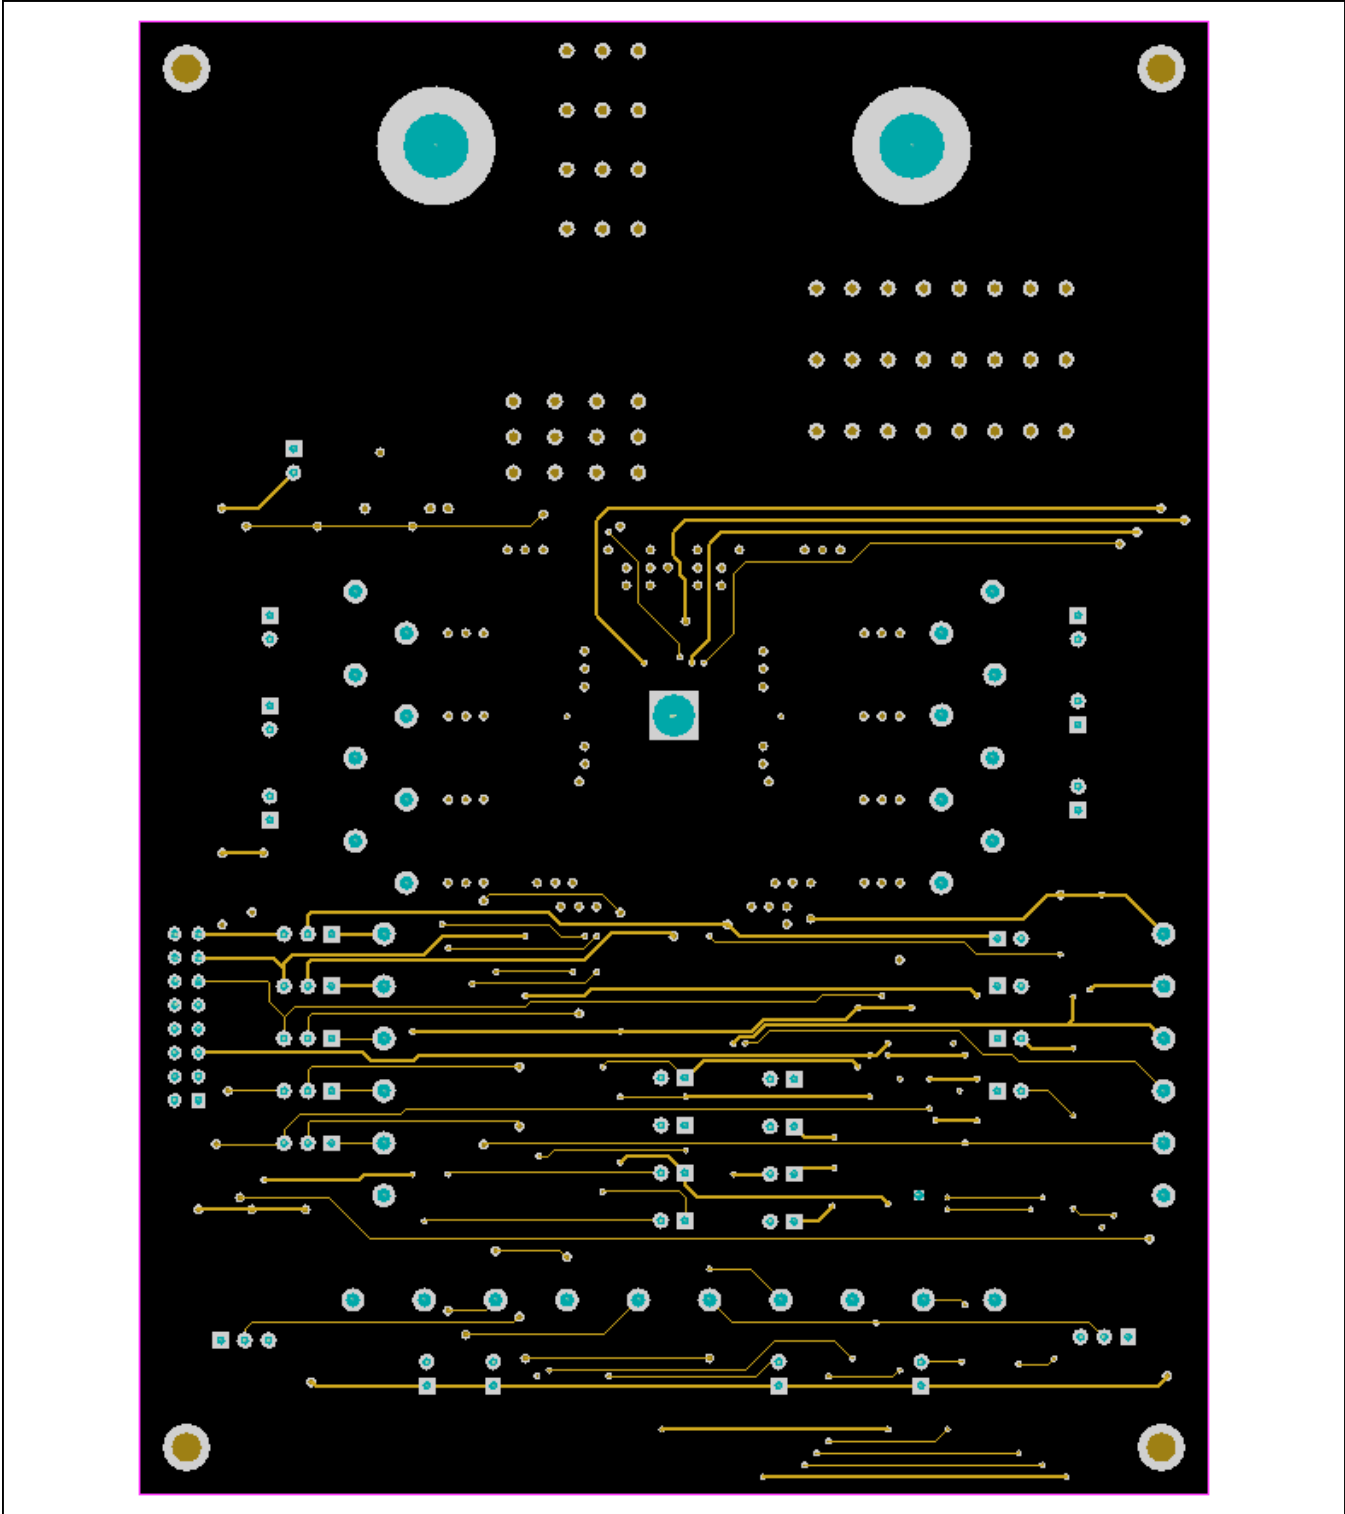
MAX14900E EV Kit PCB Layout—Mid-Layer 1
